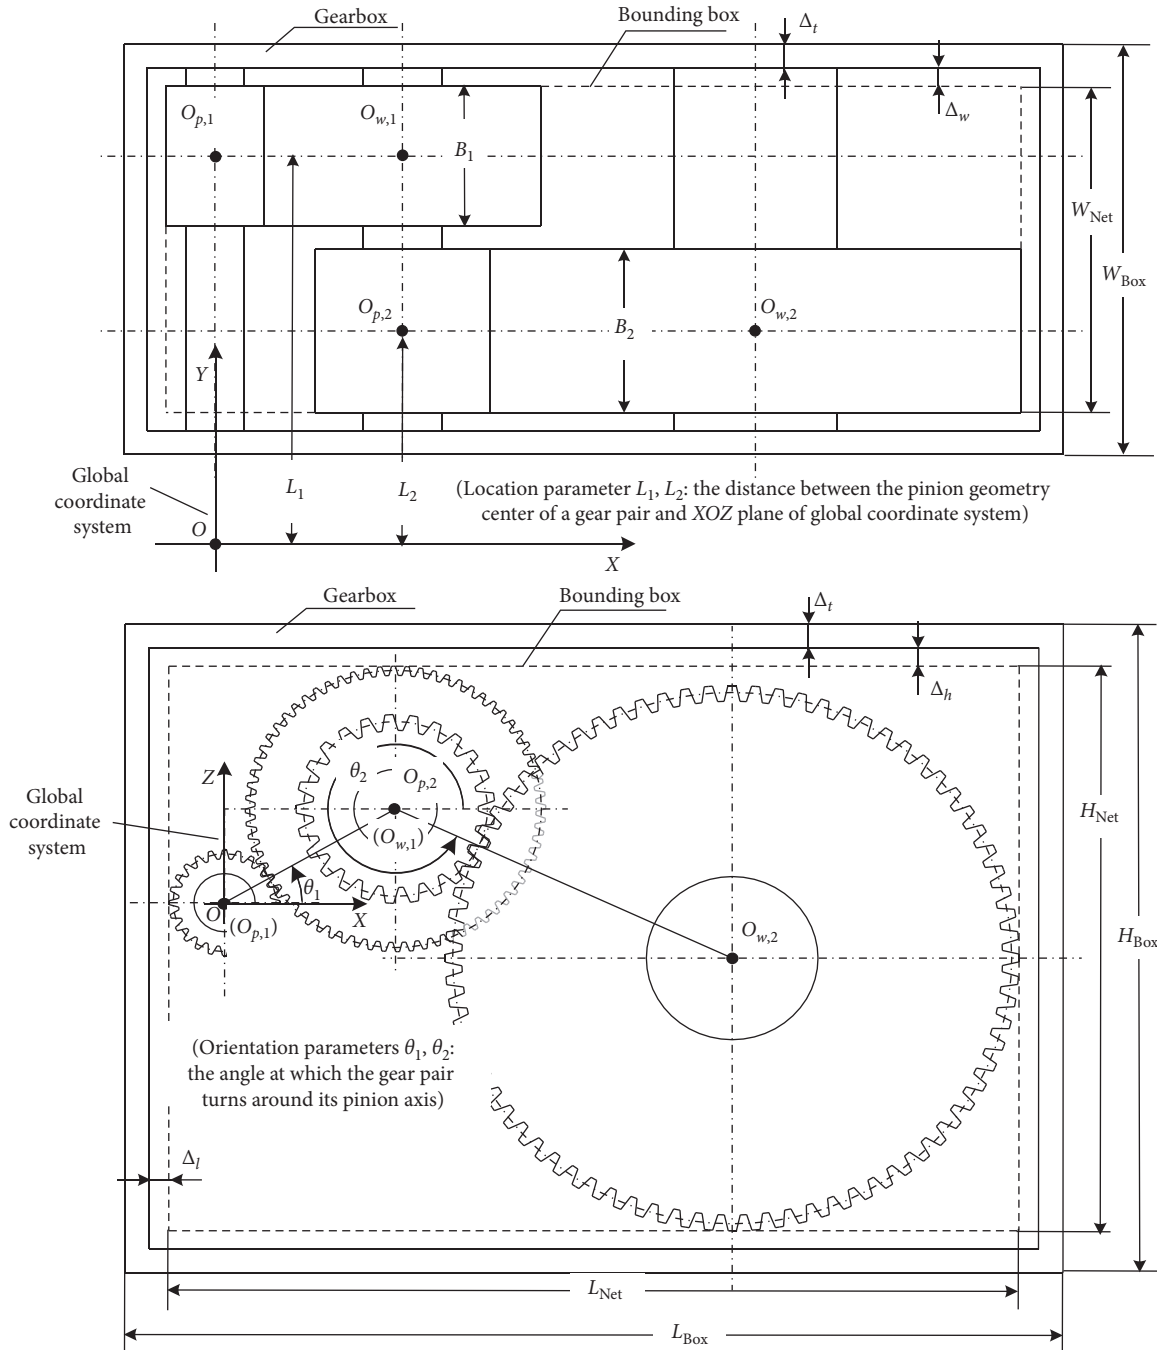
Definitions of global coordinate system, layout parameters, gearbox, and bounding box of multistage gear drives with a two-stage gear drive acting as an example.
